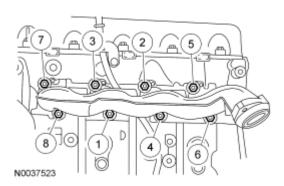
Exhaust Manifold Nuts Tightening Sequence Courtesy of FORD MOTOR CO.
